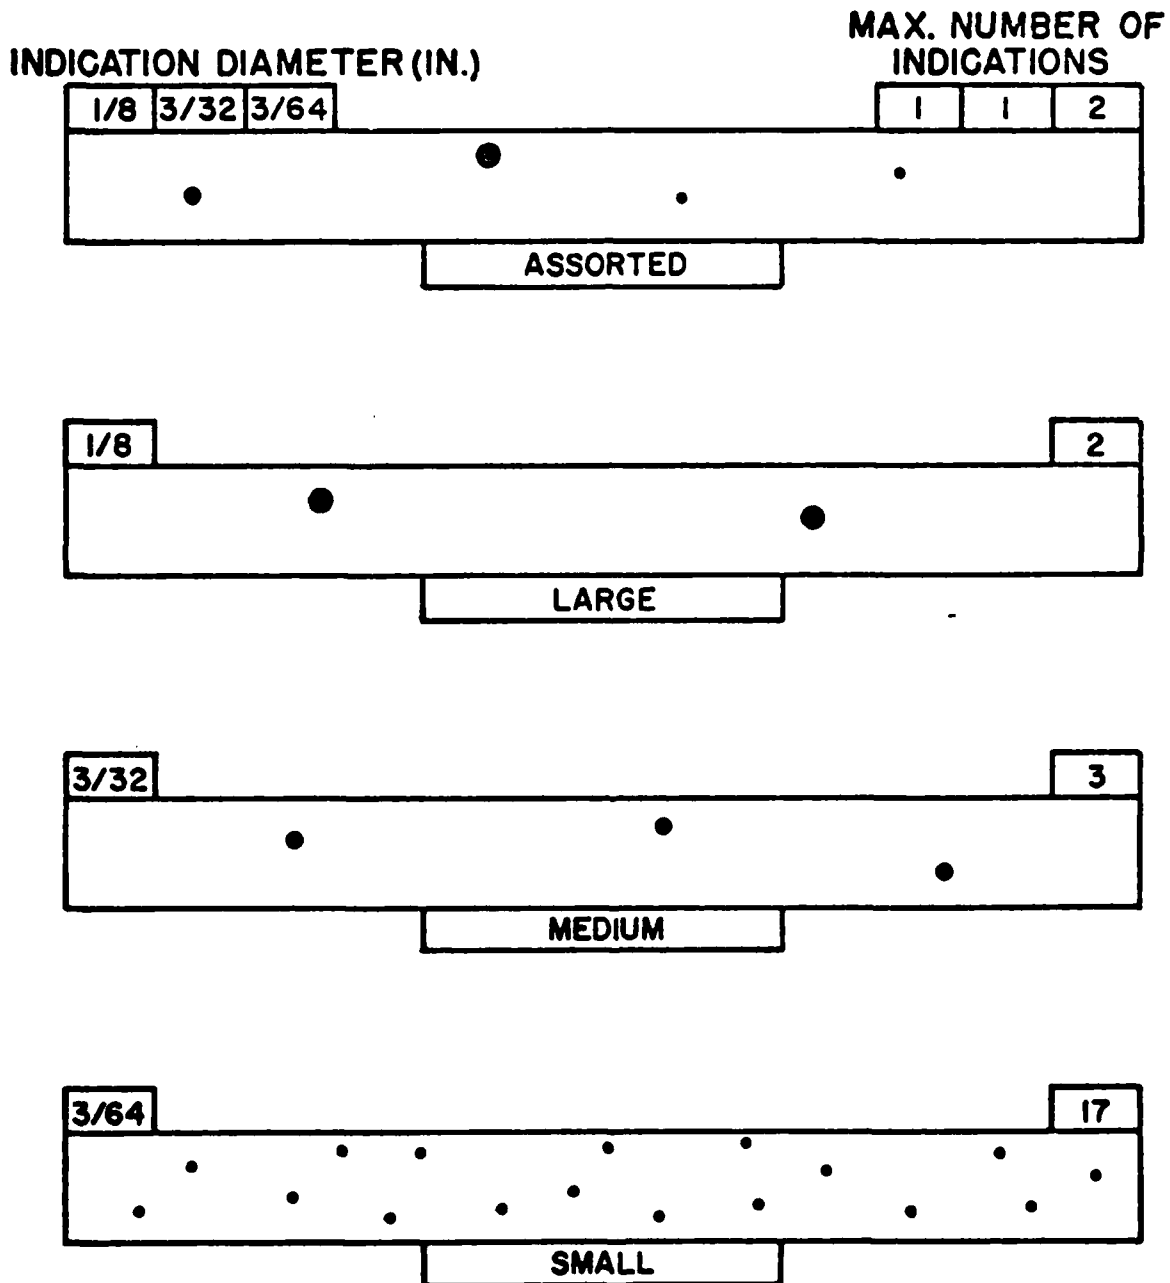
Class 3 Weld Surface Inspection Standards for Scattered Rounded or Non-Linear Indications (Sheet 4 of 6).
